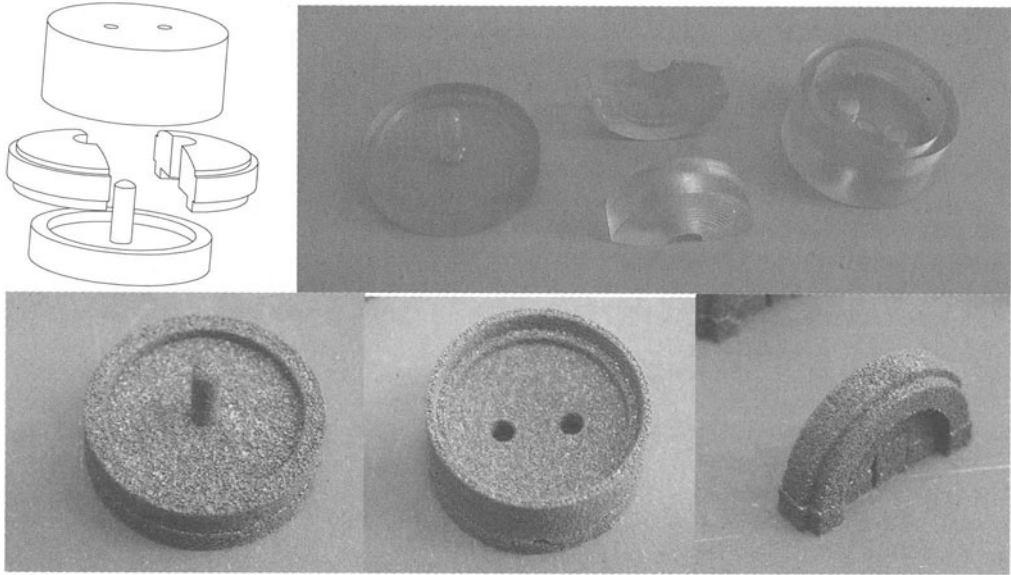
CAD model, SL and DMSLS Rapid Prototypes of mold components
